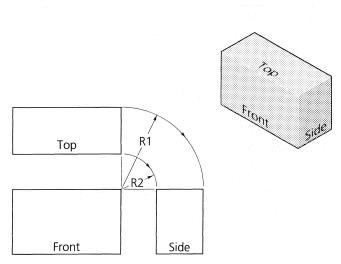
Radius Method of Projecting the Depth of the Third View
